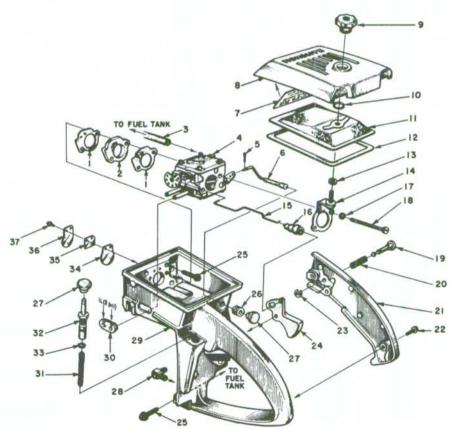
Exploded view of air box (throttle handle) and related parts on models with flat reed intake valve (34). Refer to Fig. HL31 for models equipped with pyramid reed valve.
